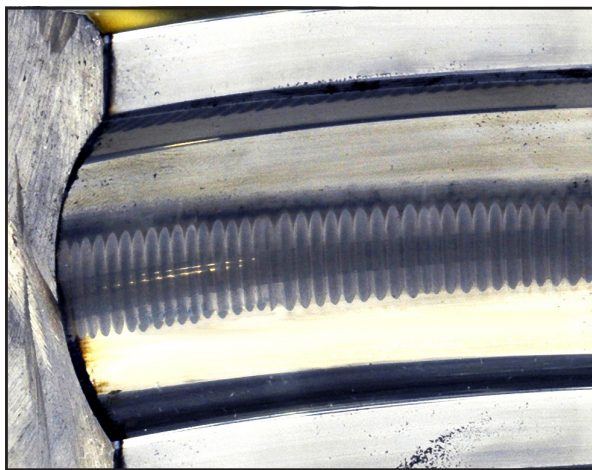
Taken from a failed motor, the “fluted” bearing race above is the result of VFD-induced bearing currents.
